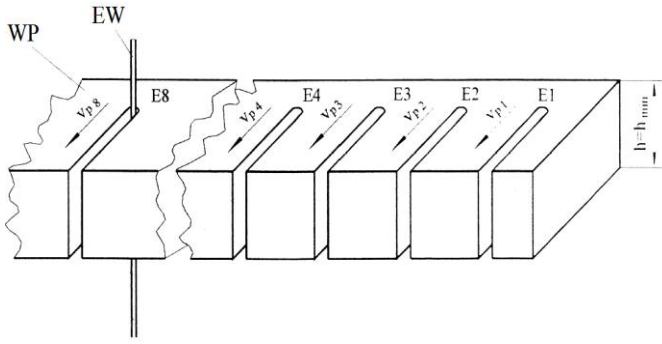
presents a schematic representation of the WEDM process. One can see that a profiled kerf is gradually generated as a controlled movement developed by the workpiece in a plan coordinates system to the travelling wire tool electrode.
